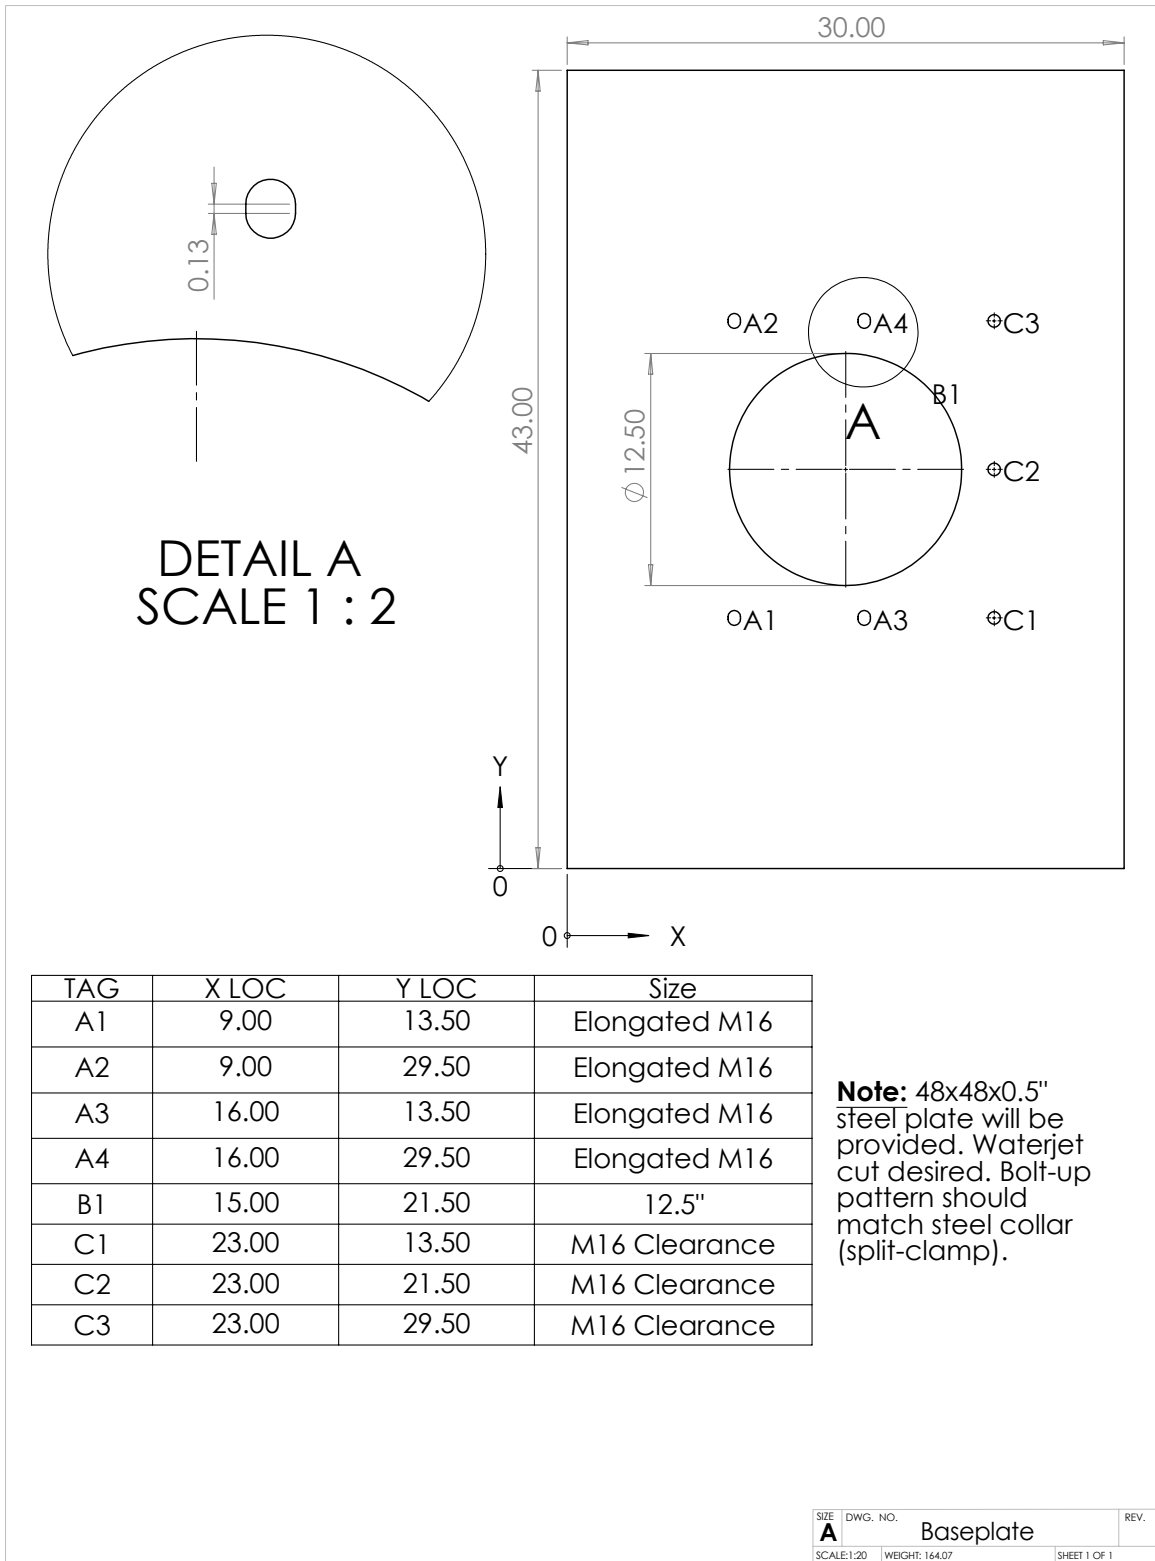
Hole pattern in base plate of box frame. Dimensions are in inches.
